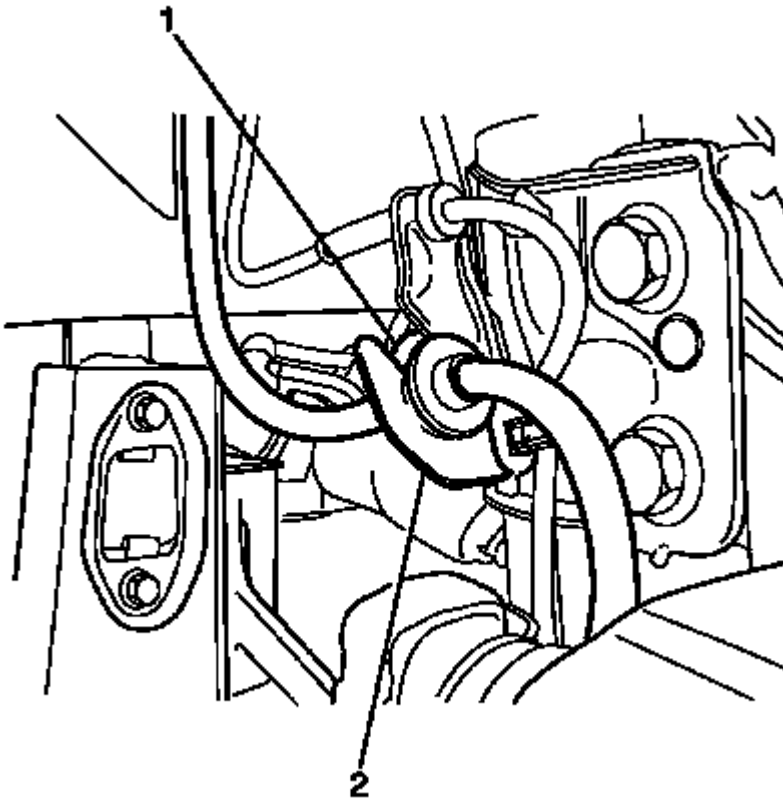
Identifying Front Brake Hose & Strut Mounted Brake Hose Retaining Bracket
